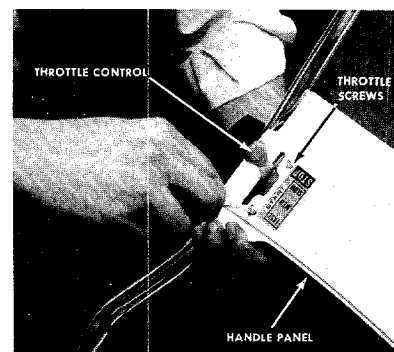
THROTTLE CONTROL ASSEMBLY
